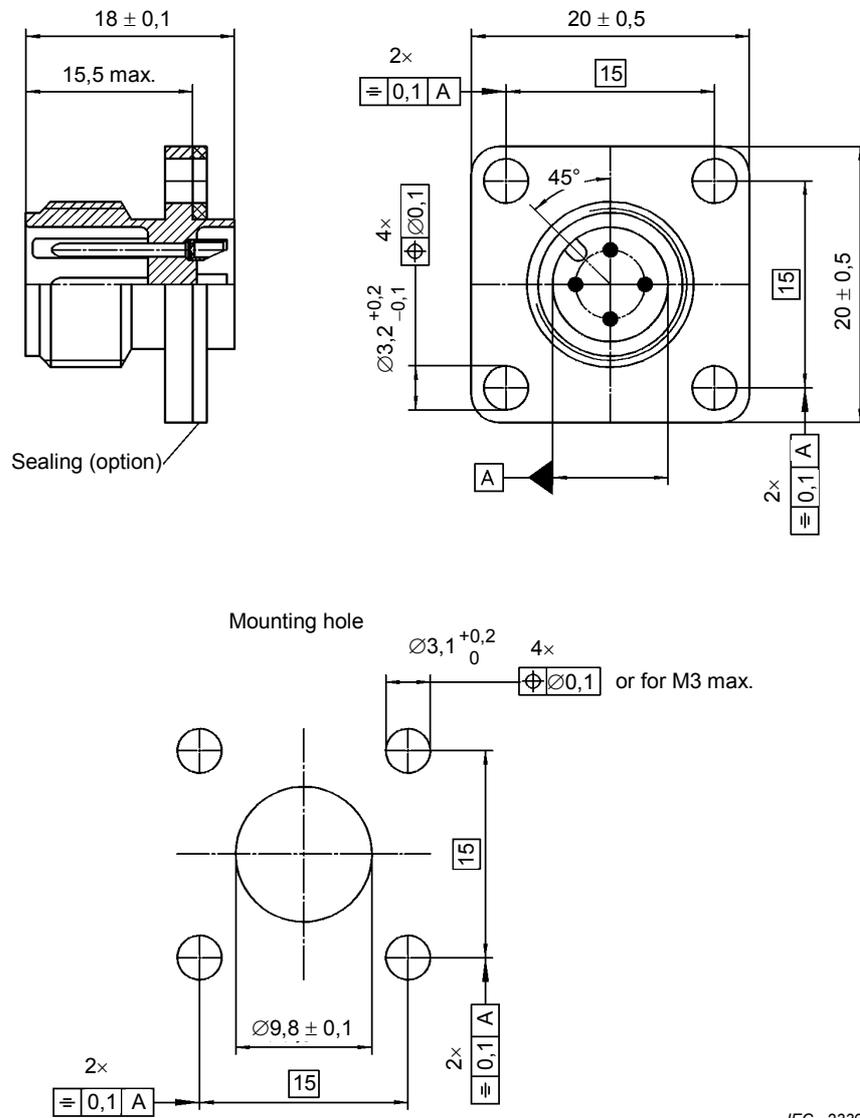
Tube insert mounting with thread M12x1, male contacts
